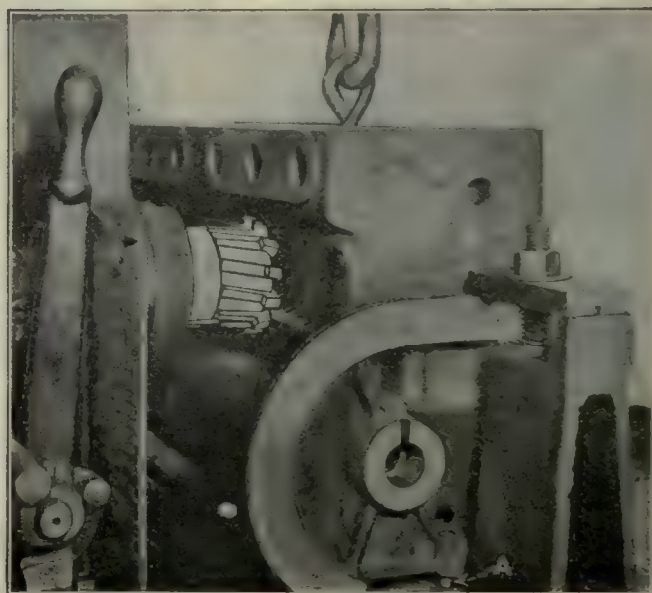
MILLING THE SEAT FOR THE VALVE-COVER PLATE
